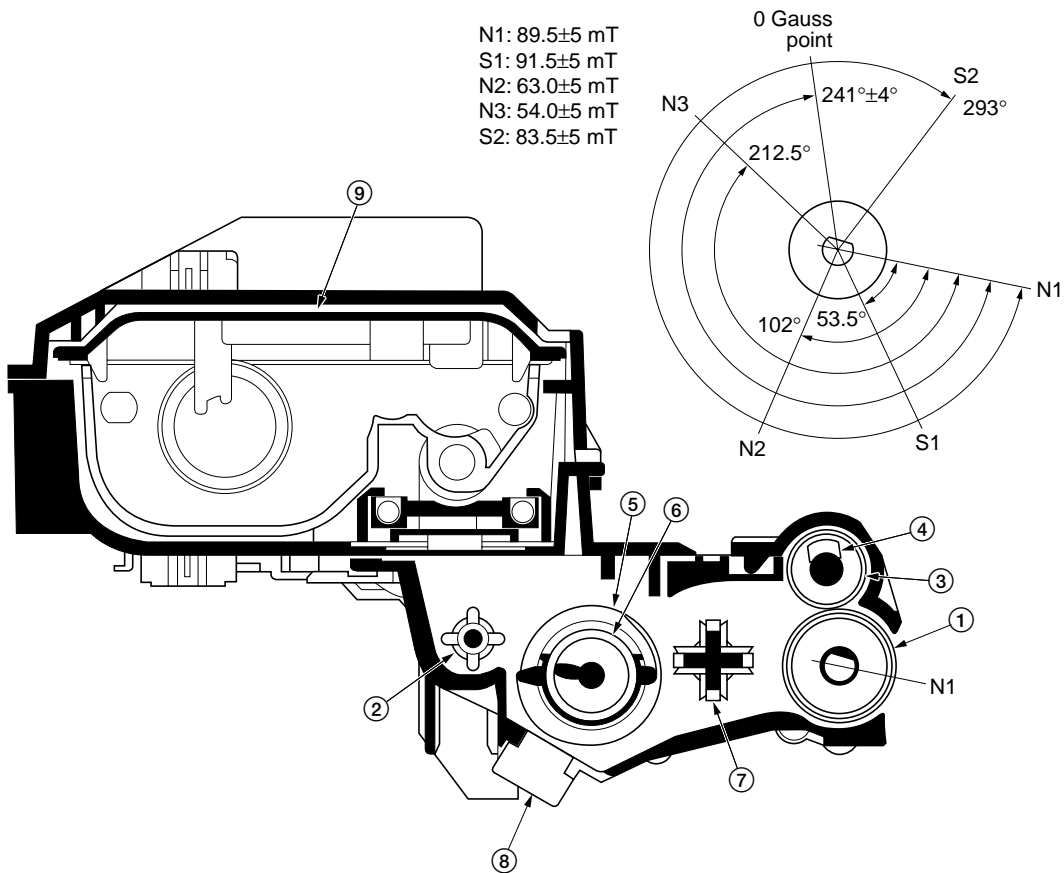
Magenta developer and magnetic poles on the developing roller
